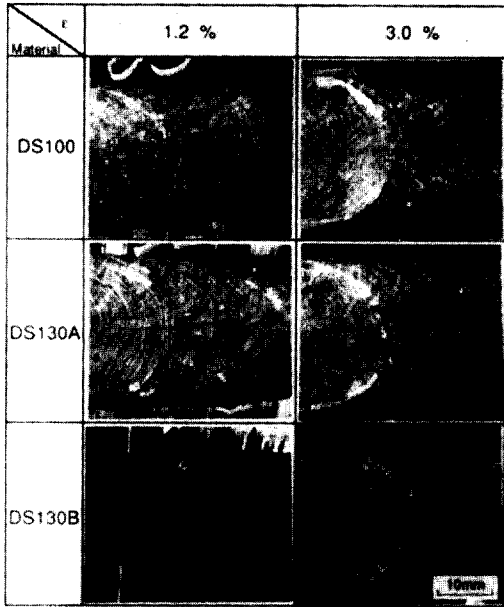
Typical appearance of cracks on the surface of weld metal after the Trans-Varestraint test
